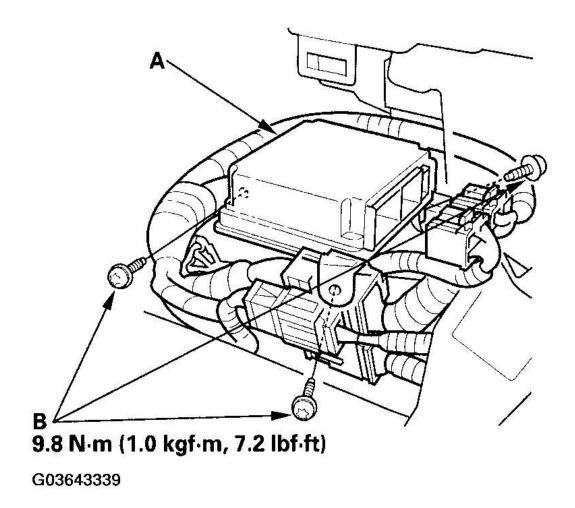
Disconnecting Connectors And Removing Torx Bolts Courtesy of AMERICAN HONDA MOTOR CO., INC.
